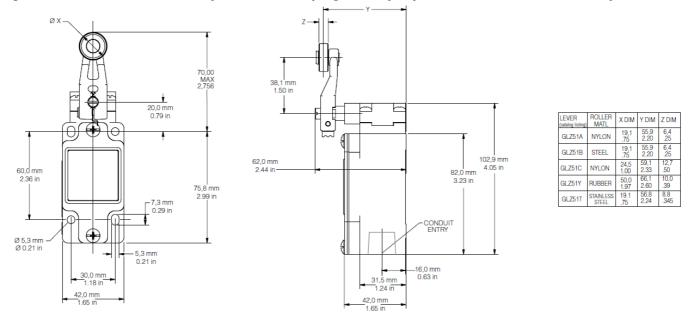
Fixed Lever, Side Rotary Switch - Plug-in Body Style, GLZ51 lever, and GLB body
